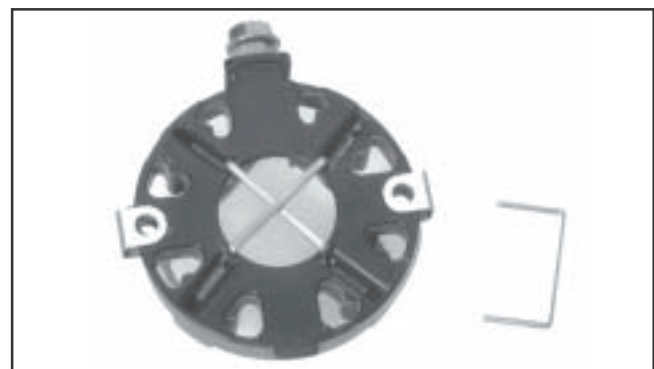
Style "B" Commutator End Cap with Brushes.
